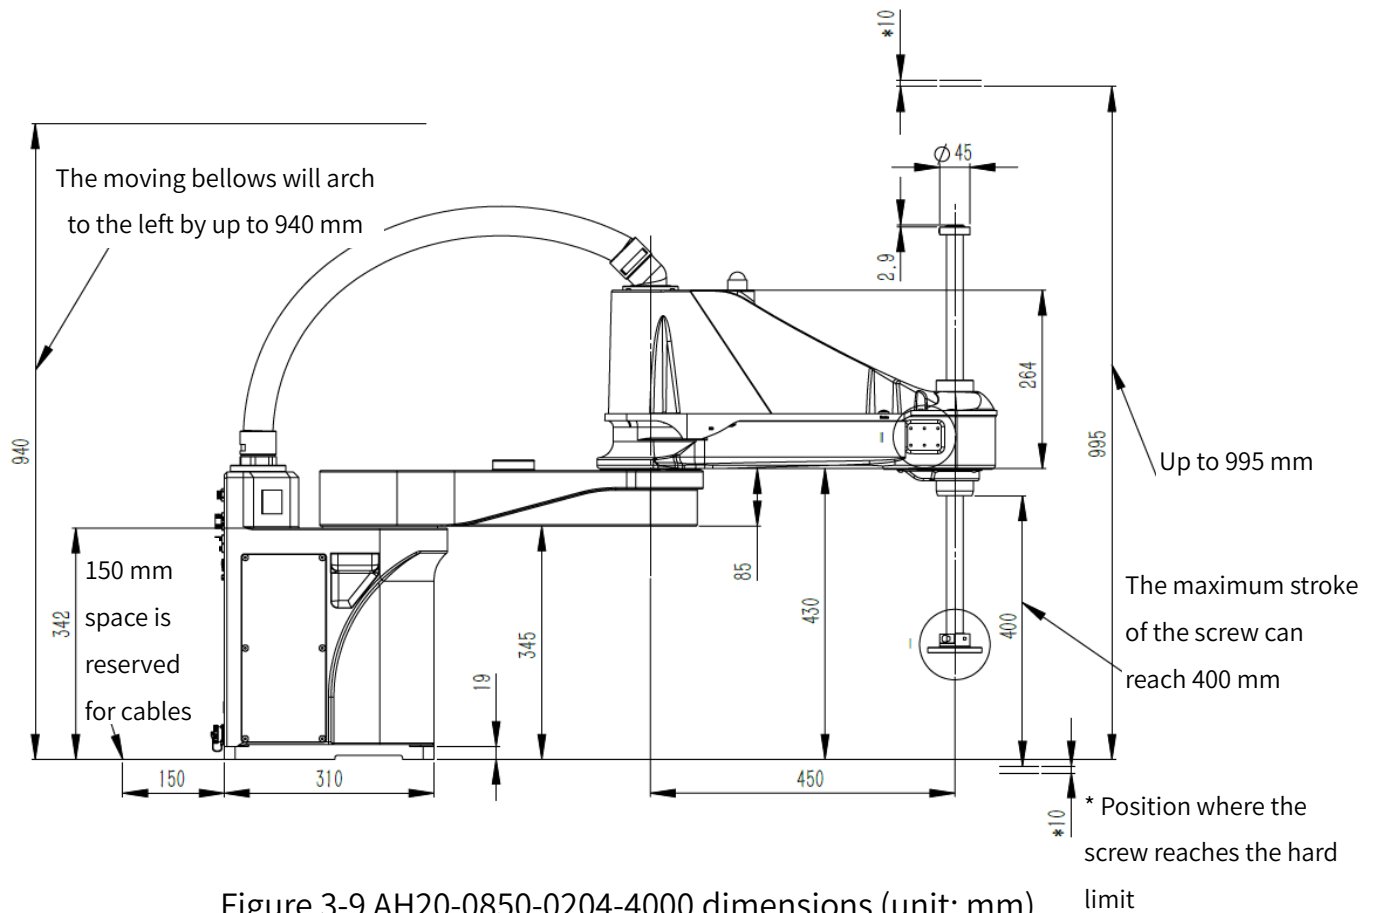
AH20-0850-0204-4000 dimensions (unit: mm)
